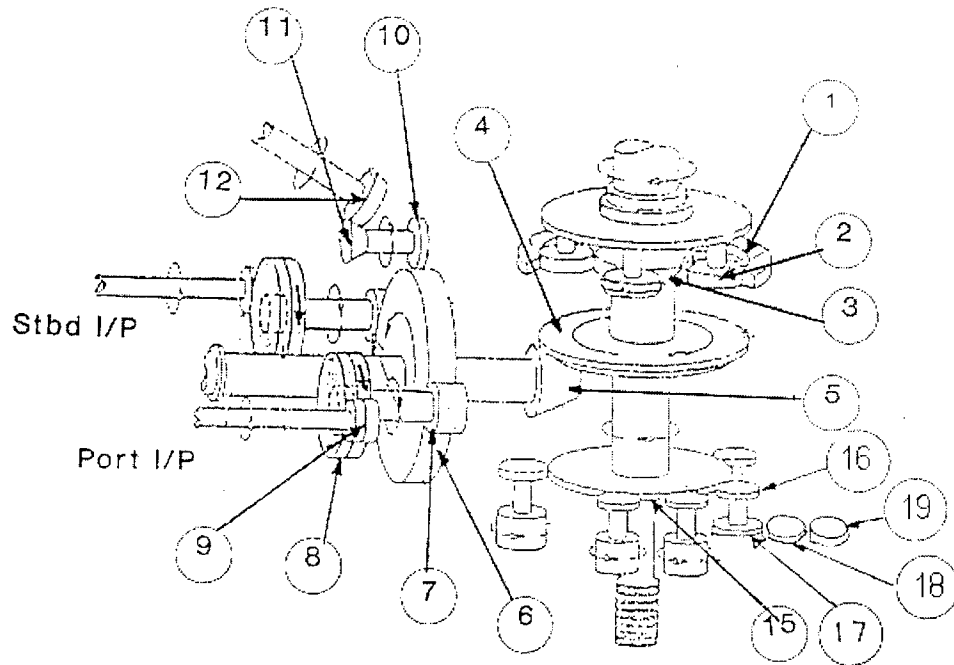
CH-46 Gearbox Schematic (Westland Helicopters) [2]
